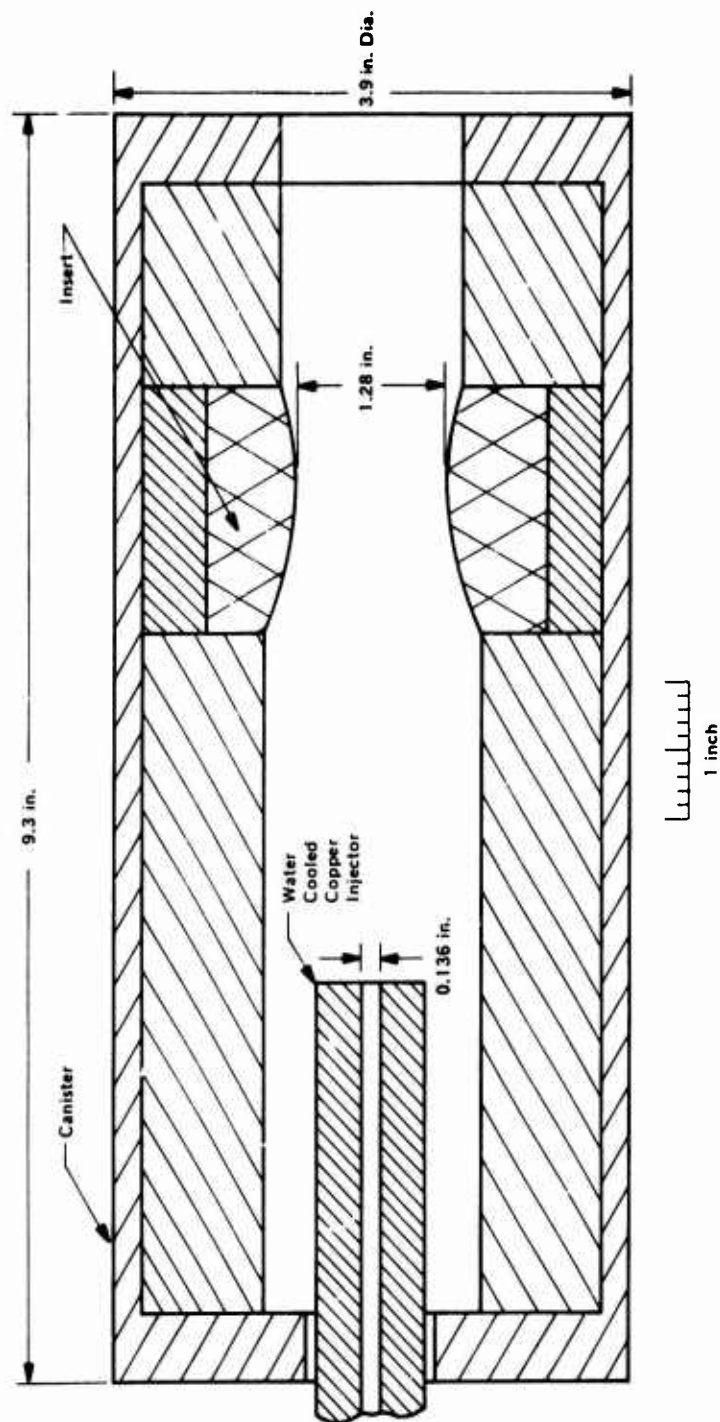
1.0-Inch Subscale Throat Insert Deposition Assembly.
